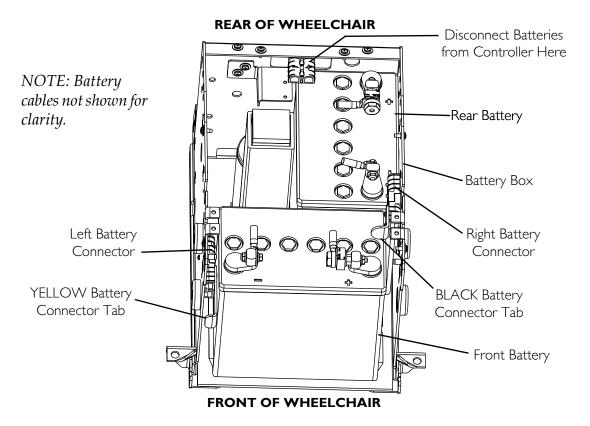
Installing Batteries into Wheelchairs with Elevate
